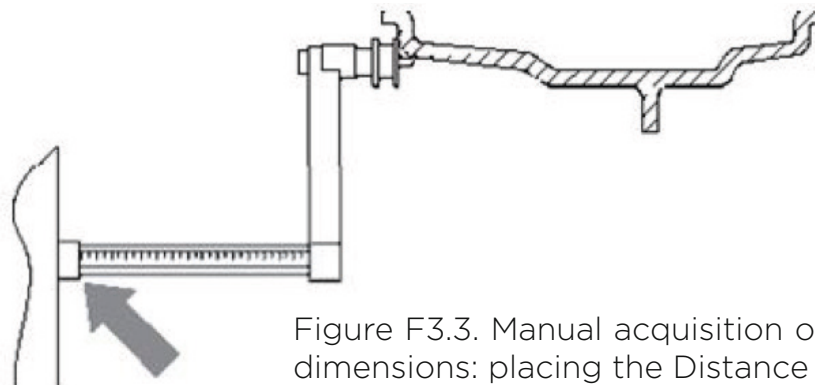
Manual acquisition of wheel dimensions: placing the Distance sensor
